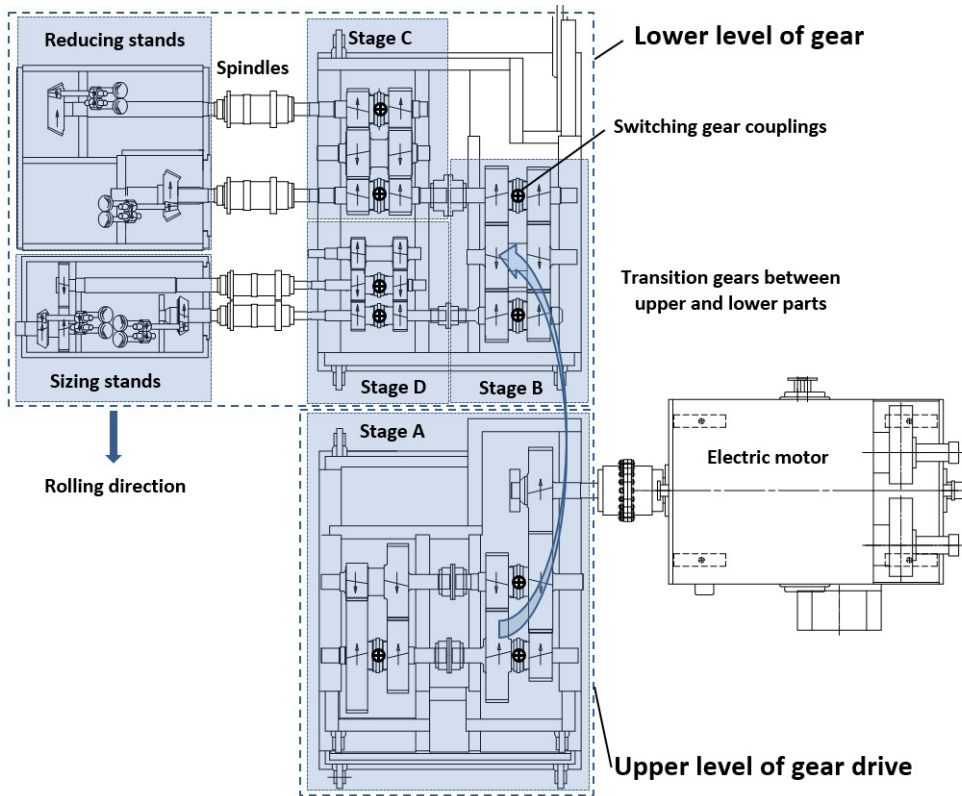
Structure of the RSM drive and locations of gearbox ratio control clutches (⊕)
